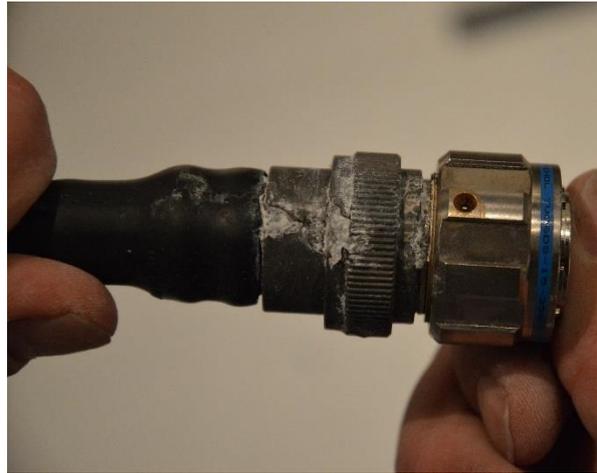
Flakings and pieces missing from the surface plating. Plate #2 position #8.
